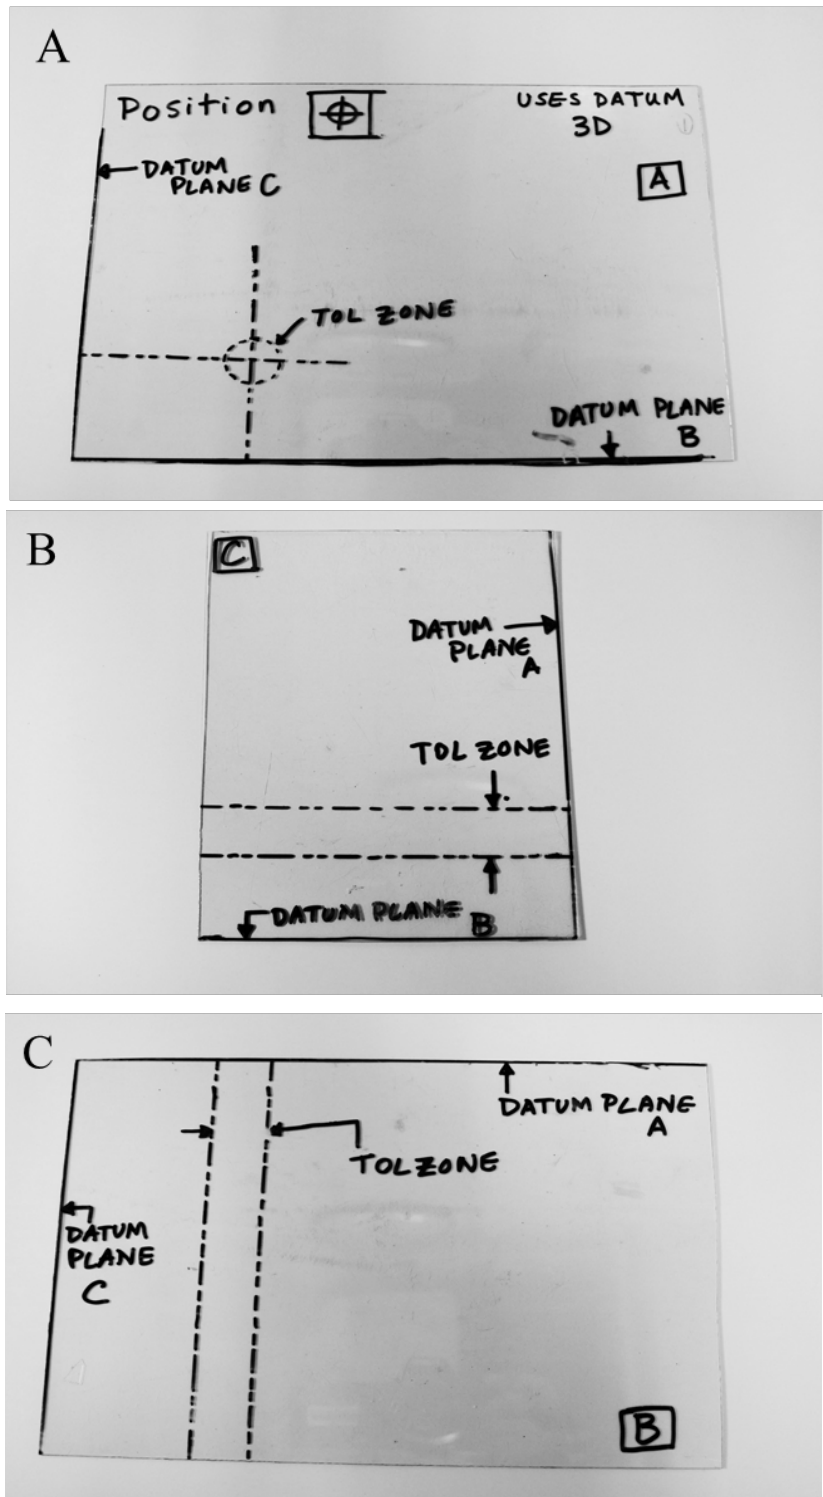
Supplemental Views of GD&T Spatial Learning Tool for Position Tolerance
